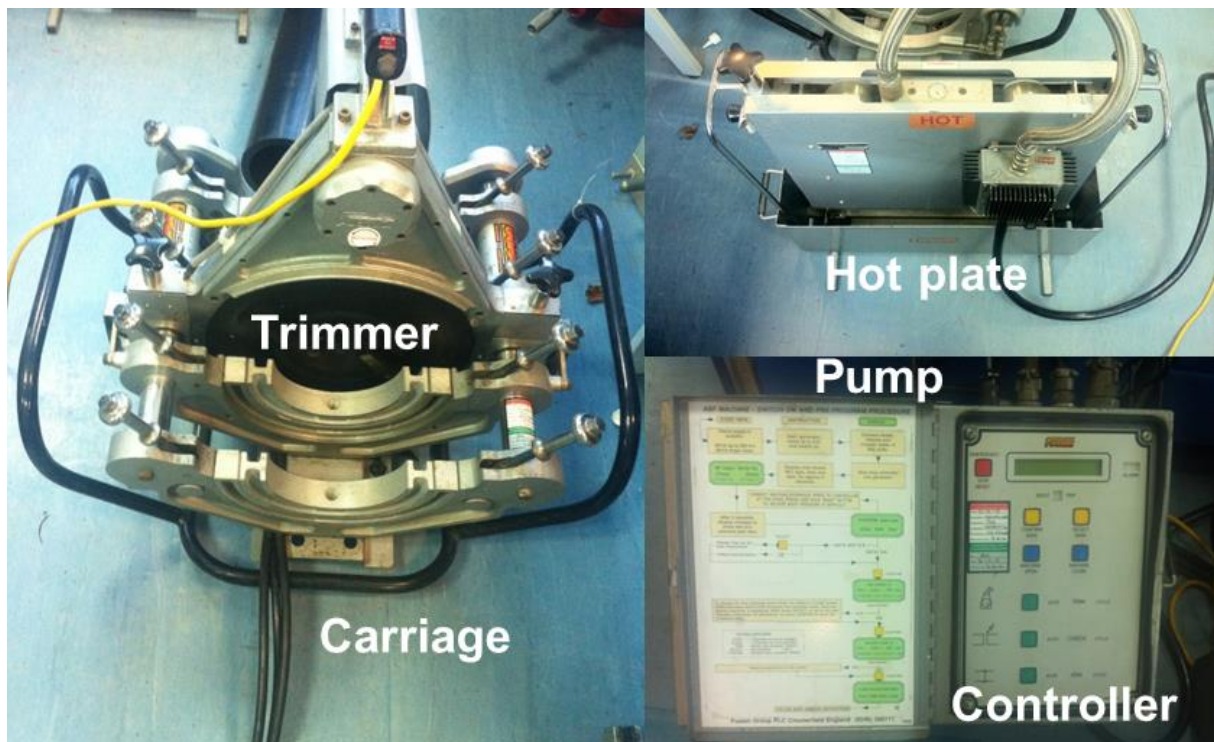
A Fusion Provida (UK) ABF315 butt fusion welding machine
